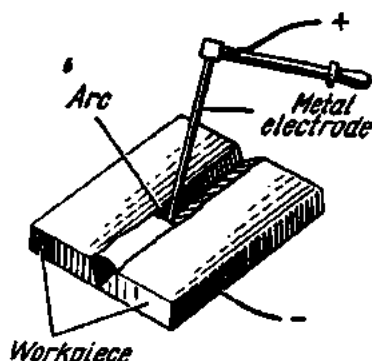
The Slavianoff (metal-electrode) welding process
